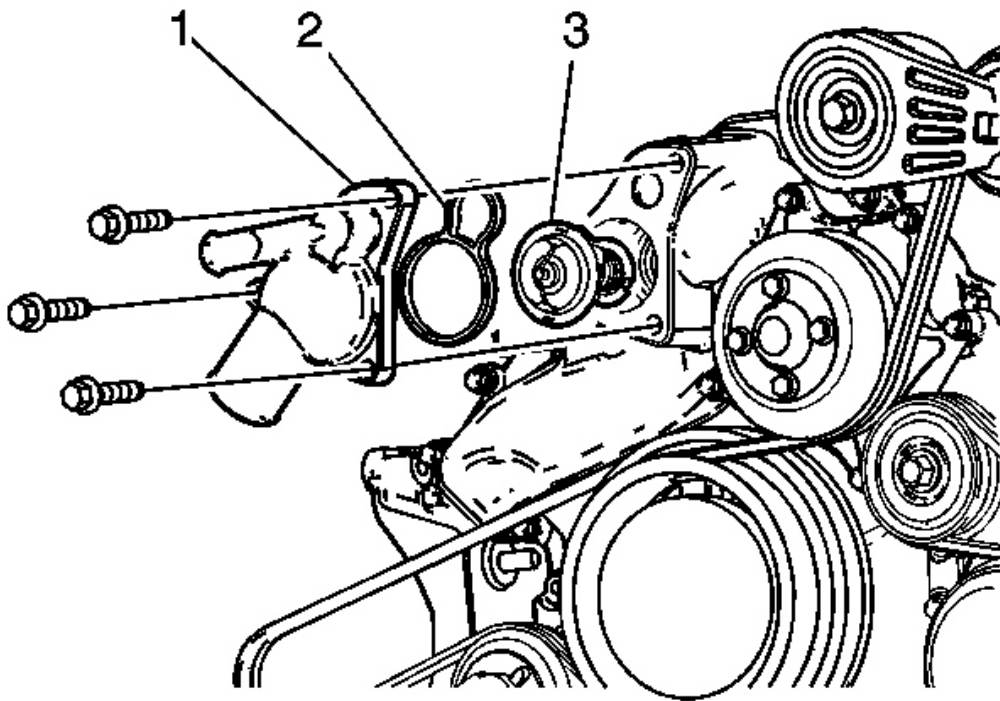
View Of Exploded View Of Thermostat Assembly
